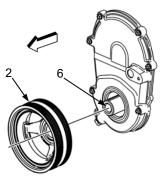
Harmonic Damper (2) and Crankshaft snout (6)
